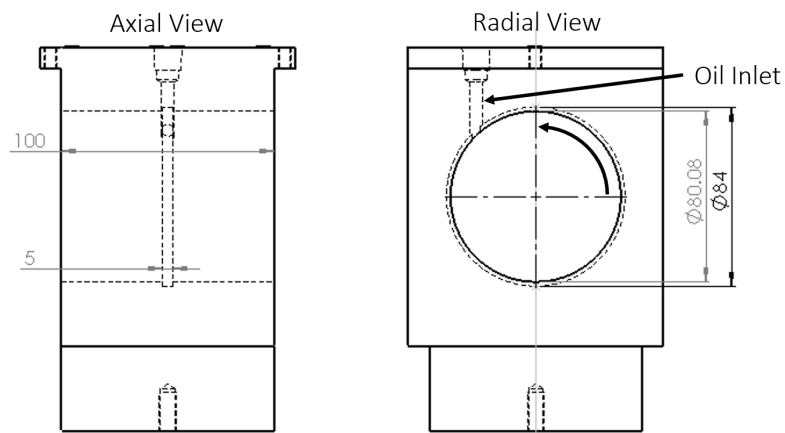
Dimensioned schematic of bearing in BETTY test platform. Curved arrow indicates the direction of shaft rotation.
